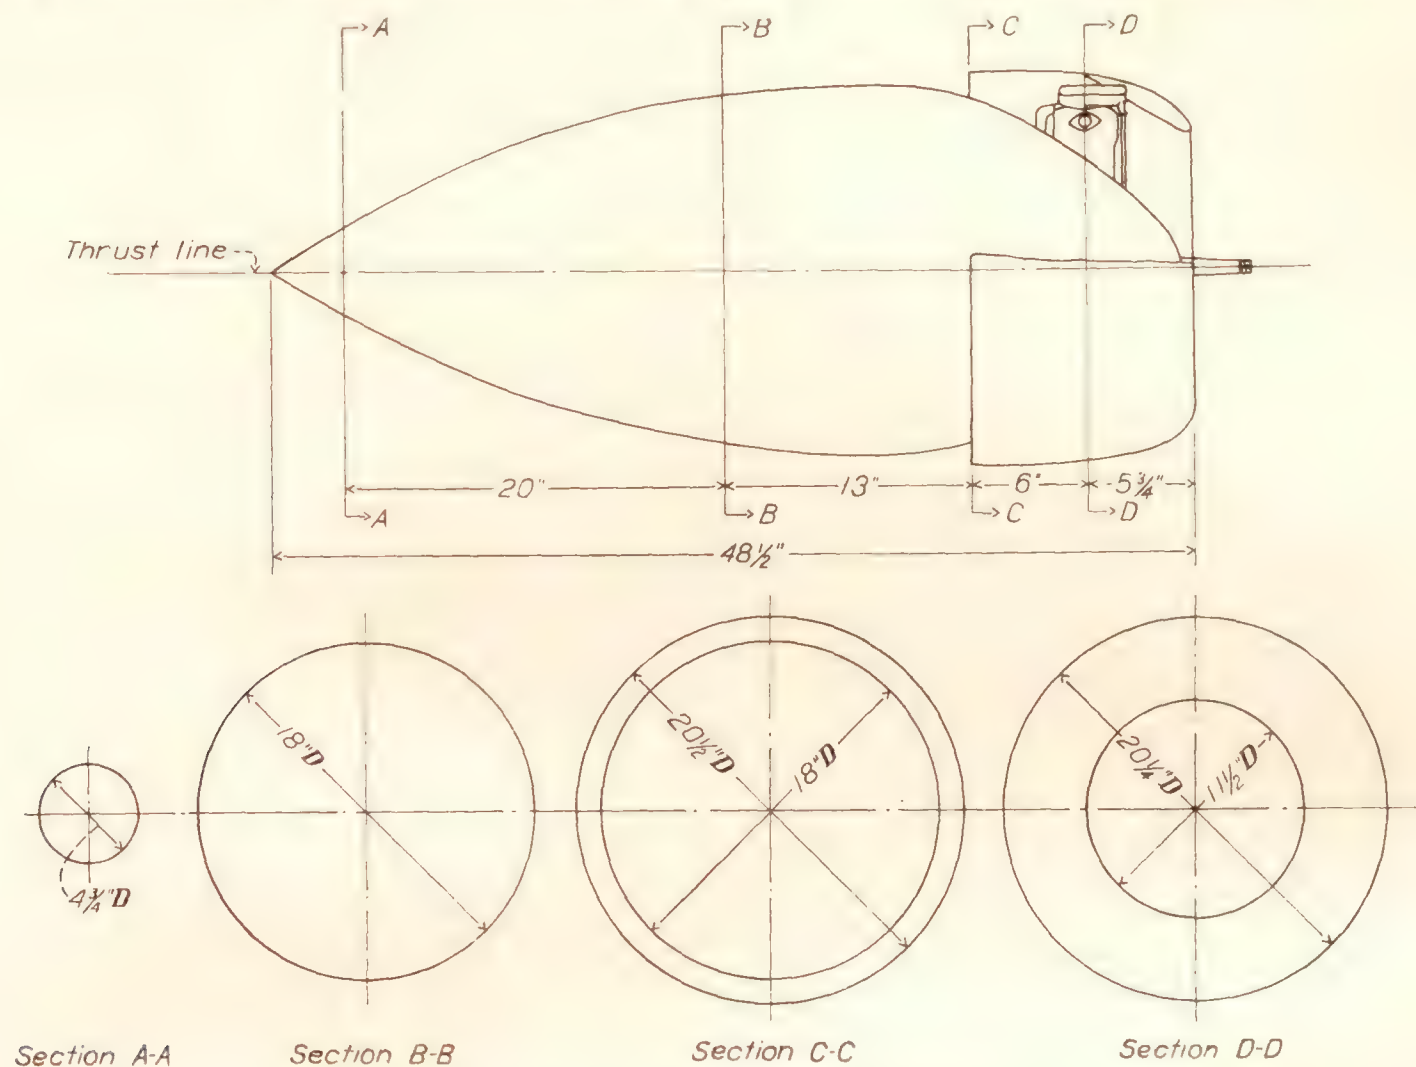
N.A.C.A. cowled nacelle and engine assembly.
